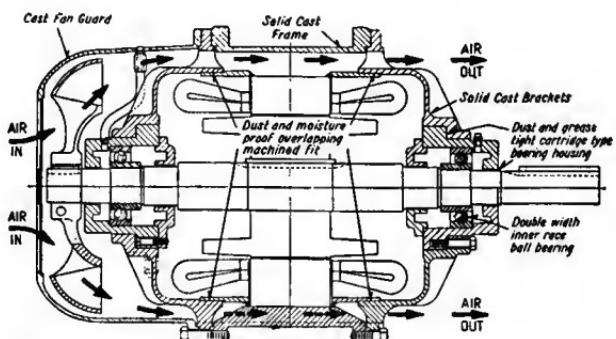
Cross Section of a Fan-Cooled Fully Enclosed Squirrel Cage Motor
